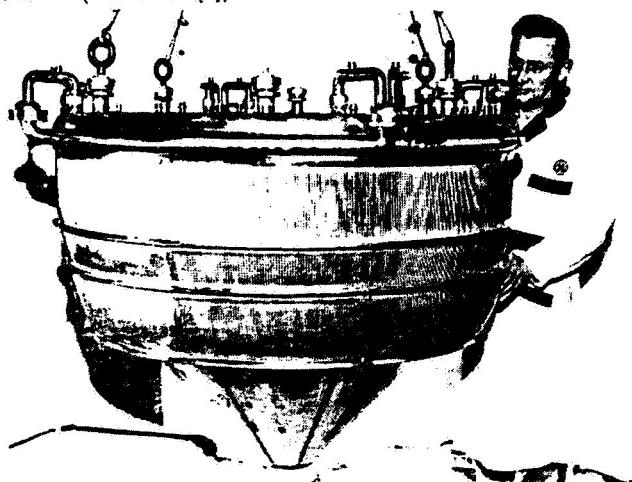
Cooled Engine Prior to Wire Wrapping and Thrust Mount Installation (from Ref. [9])
